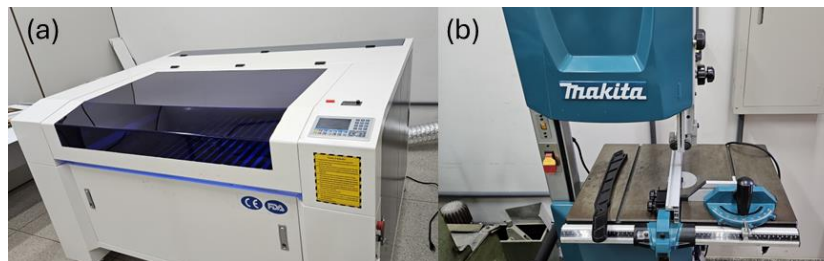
(a) Laser cutting and (b) bandsaw machines.
